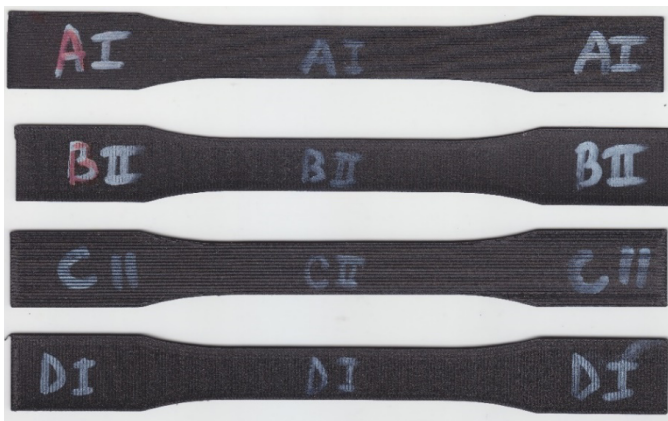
Printed specimens divided into series according to adjusted printing parameters
